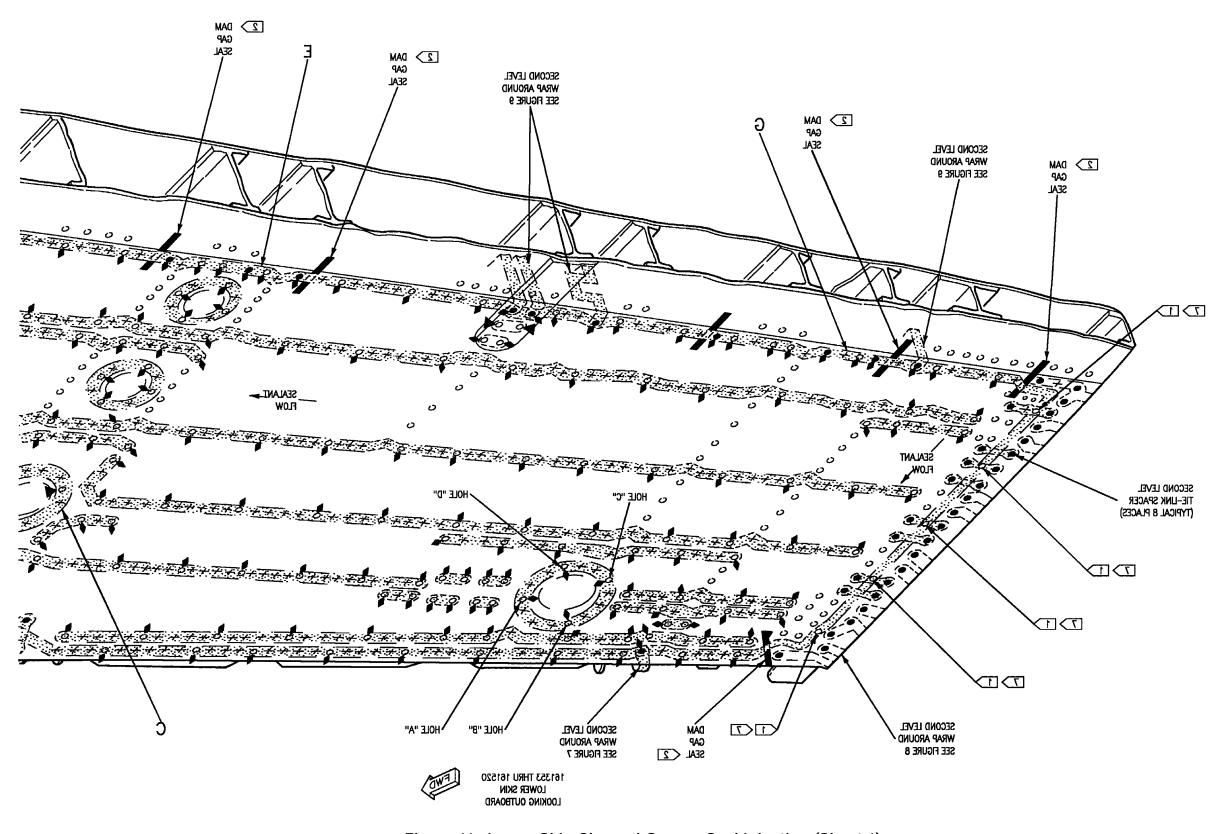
Lower Skin Channel Groove Seal Injection (Sheet 1)
